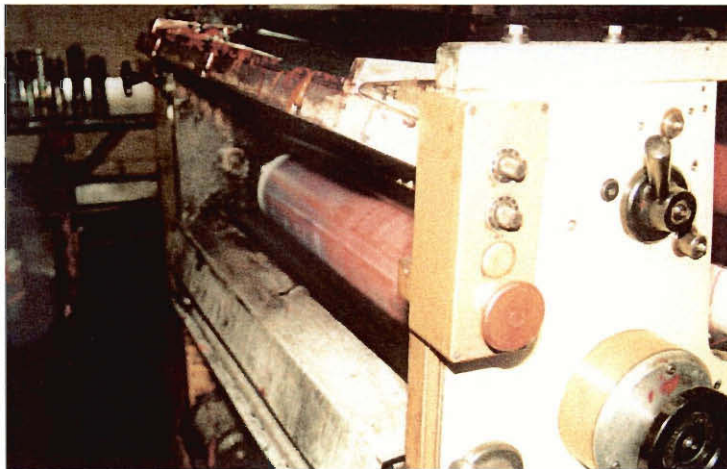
Stop Button and Hand Wheel at the end of the Cylinder
